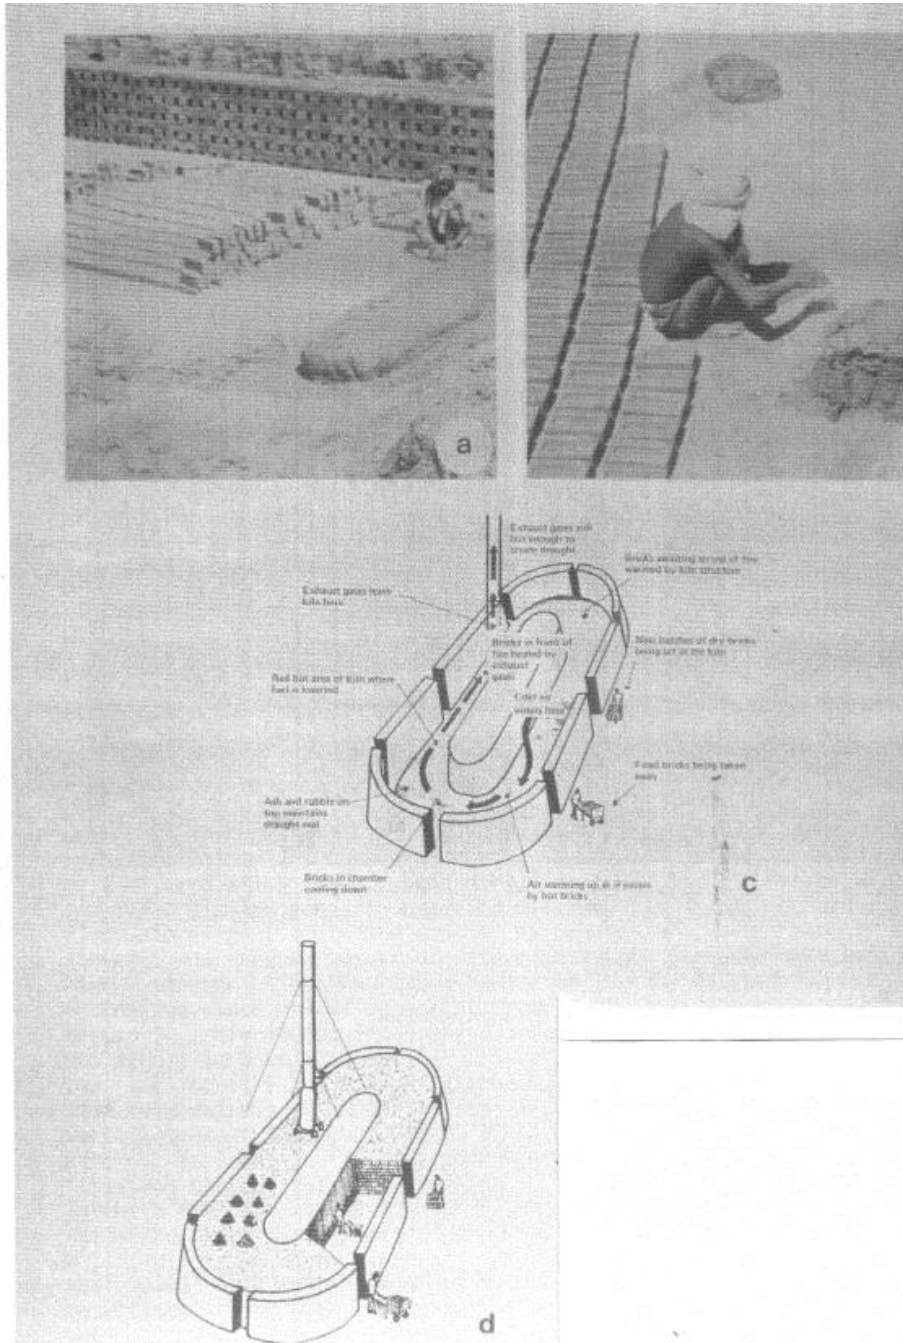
Hand-molded clay brick production in New Delhi. (a) Hand molding set-up with prepared clay which frequently has weathered over several days; (b) Freshly de-molded bricks show few dimensional defects; (c) Principal of Bull's Trench Kiln; (d) Loaded Bull's Trench Kiln with movable chimney.
